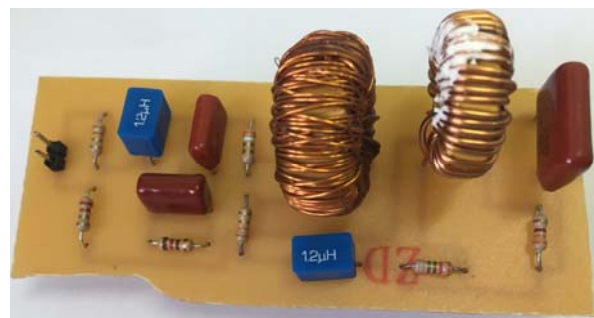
Printed circuit board (PCB) used for representing the electrical model of the ESP cable
